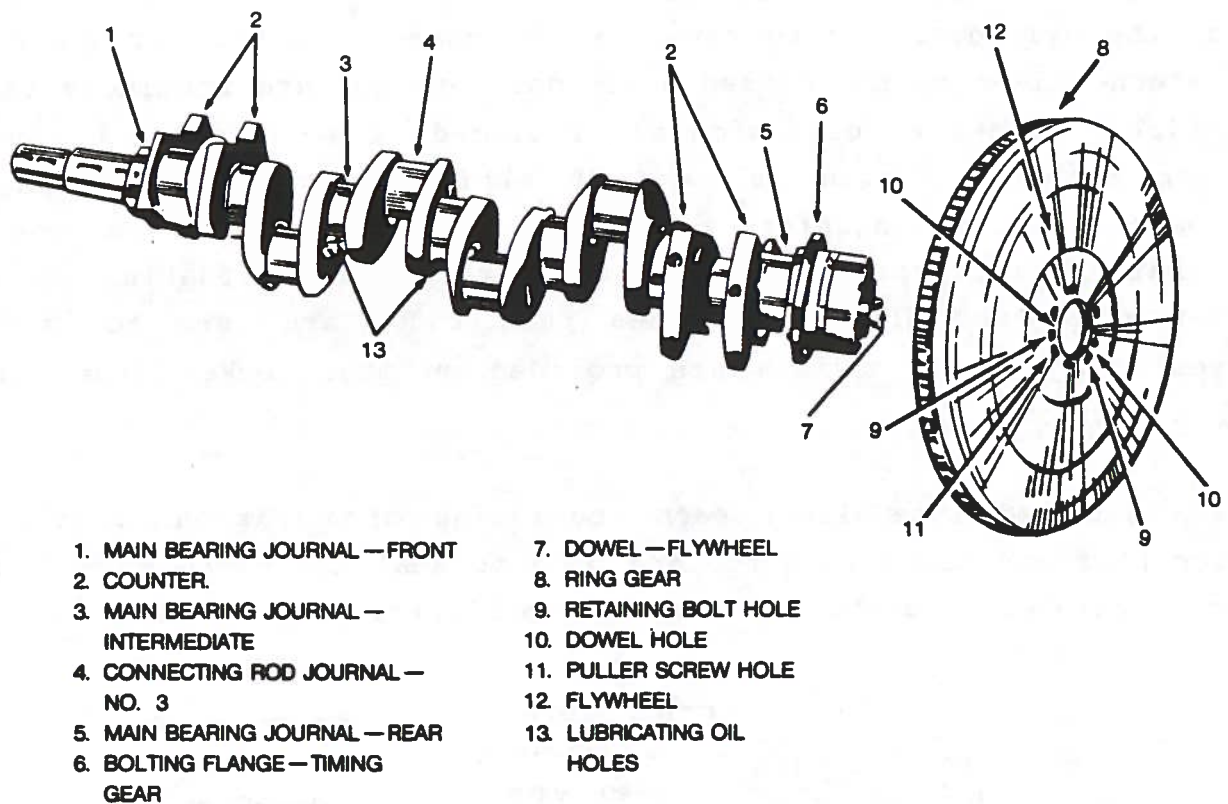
2 ONE-PIECE, 6-THROW CRANKSHAFT WITH FLYWHEEL
